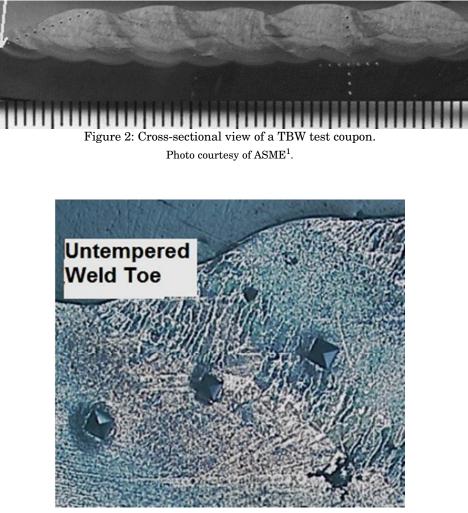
Untempered weld toe following TBW. 35x, zoomed in. Photo courtesy of  $\mathrm{ASME}^1.$
